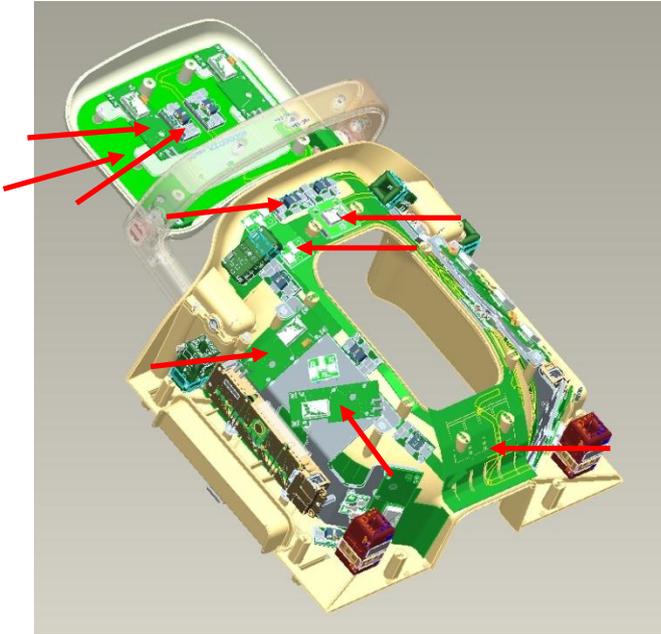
, 1b, NVC Head Neck 3T examples of pcb locations
